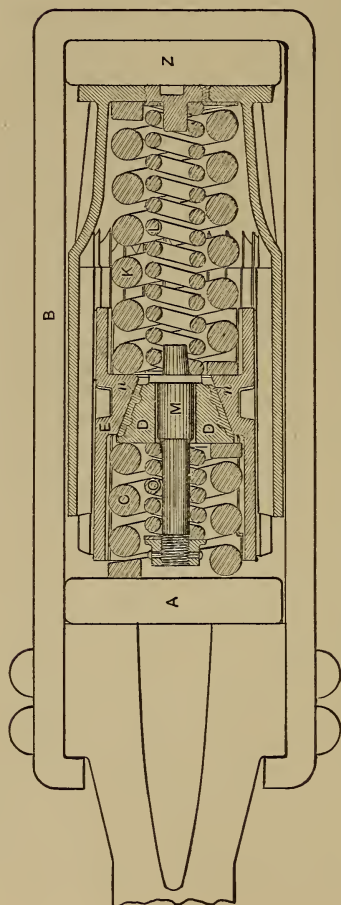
Longitudinal section of Westinghouse friction draft-gear.
